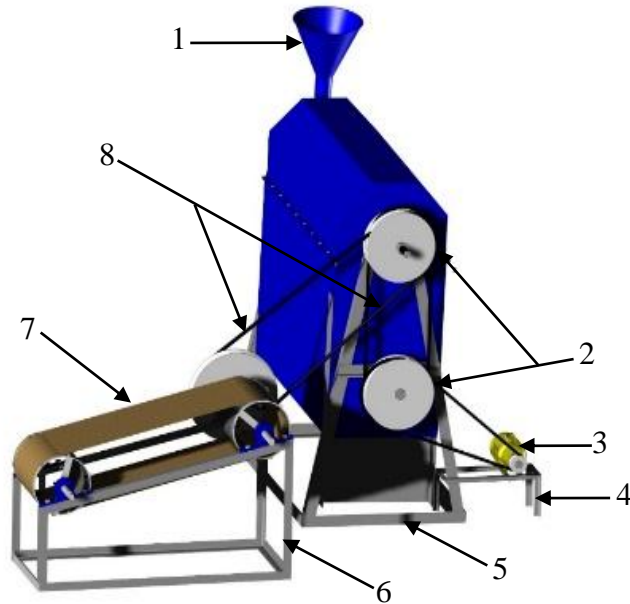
Proposed separating machine Figure 2: Cross-sectional representation of the separating machine.
